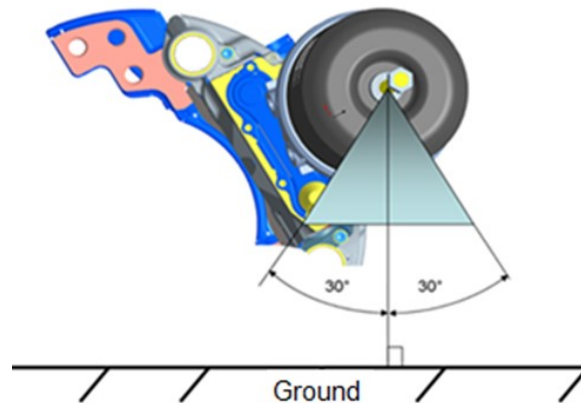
Spatial position of the breather hole in the brake cylinder for axial brakes
